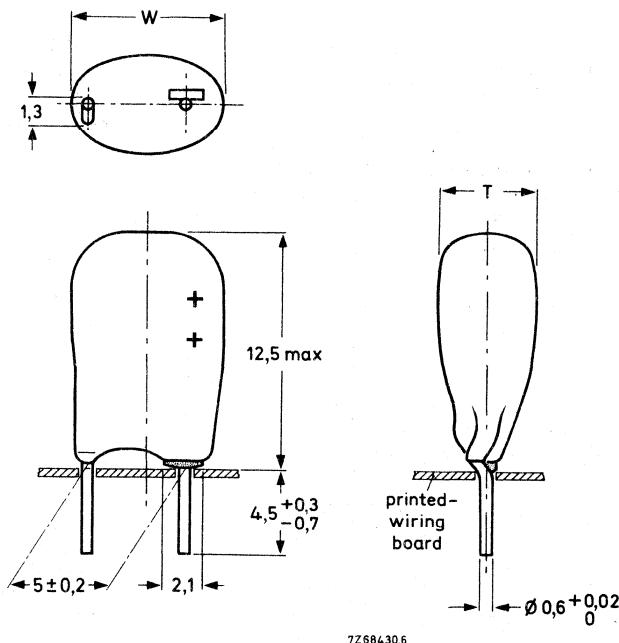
Style 1; see Table 1 for dimensions T and W.
